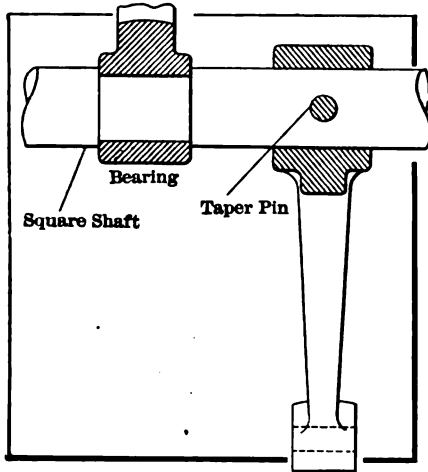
Taper pin placed to prevent a lever from rotating on the shaft
